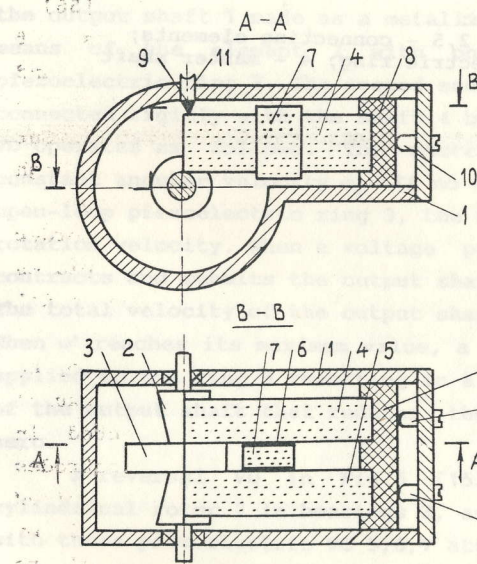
Vibromotor: 1 - frame; 2 - rotor; 3 - disc; 4,5-piezoelectric plates; 6 - dielectric spacers; 7 - additional vibroconverter; 8 - mount; 9-support; 10,11-screws
